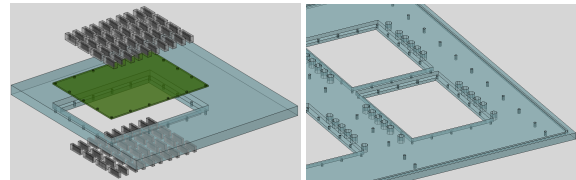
Zoomed view of the back panel:PCB plate with signal connectors on both sides (left), detail with the feed-troughs holes (right).
